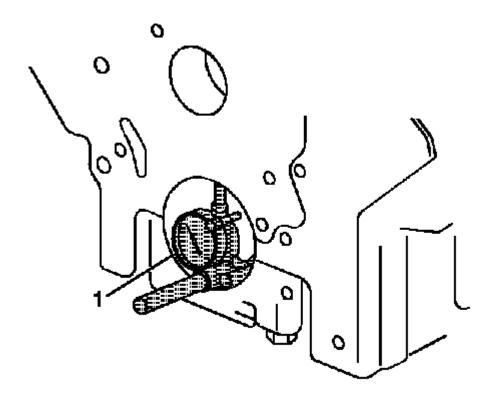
Measuring Bearing Bore Courtesy of GENERAL MOTORS COMPANY
